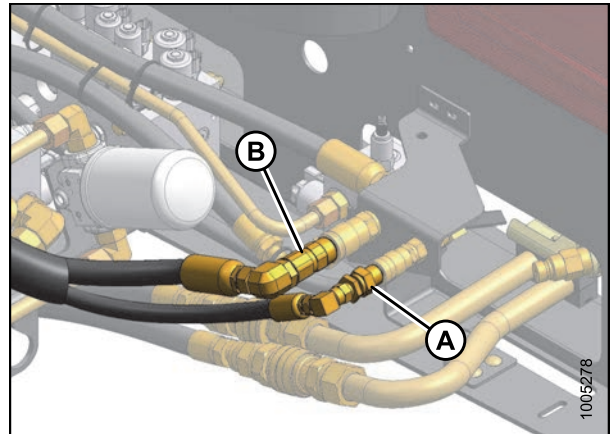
Auger/Reel Pressure and Auger/Reel Return Hose Couplers
